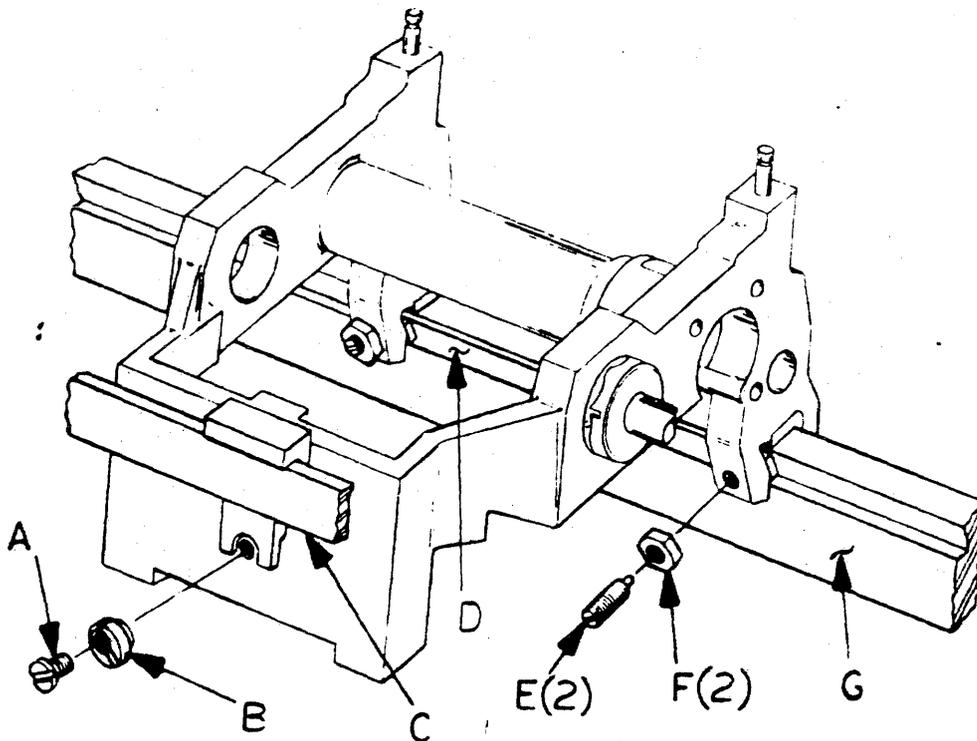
CARRIER ASSEMBLY ADJUSTMENT
